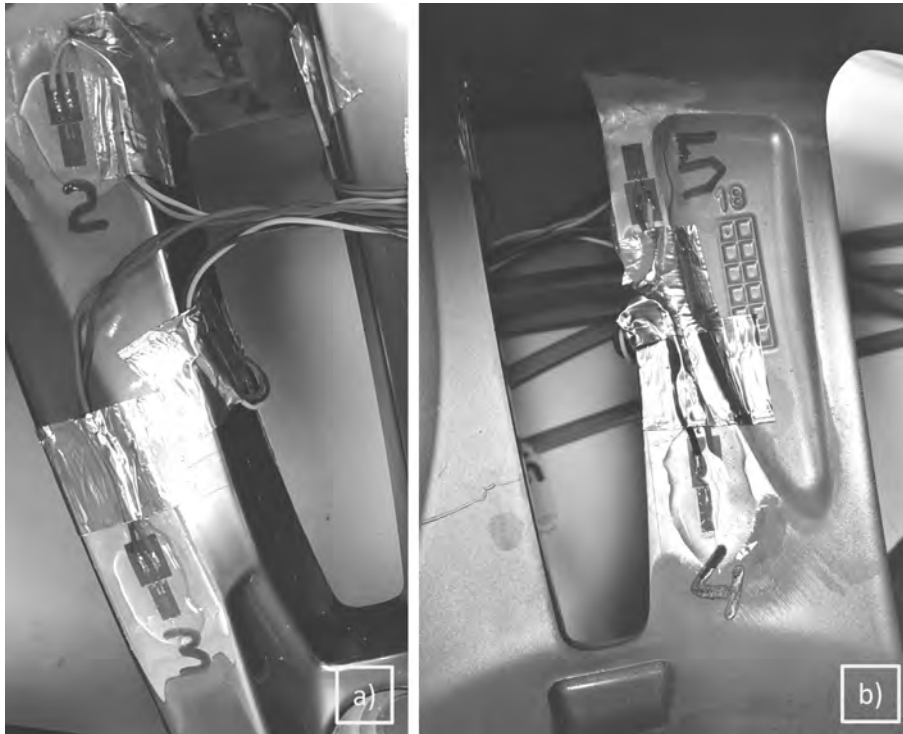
Position of the strain gauges on front (a) and back side (b) of the wheel used in the 13° side impact test.
